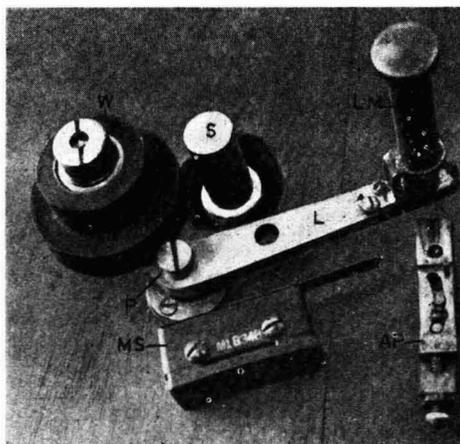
FRICTION DRIVE AND THE LOCKING SYSTEM ENABLING VARIATION OF TURN-TABLE SPEED [AP, plate assembly; L, crank lever; LM, locking mechanism; MS, microswitch; P, lever pivot; S, motor spindle extension; and W, hard rubber wheel]
